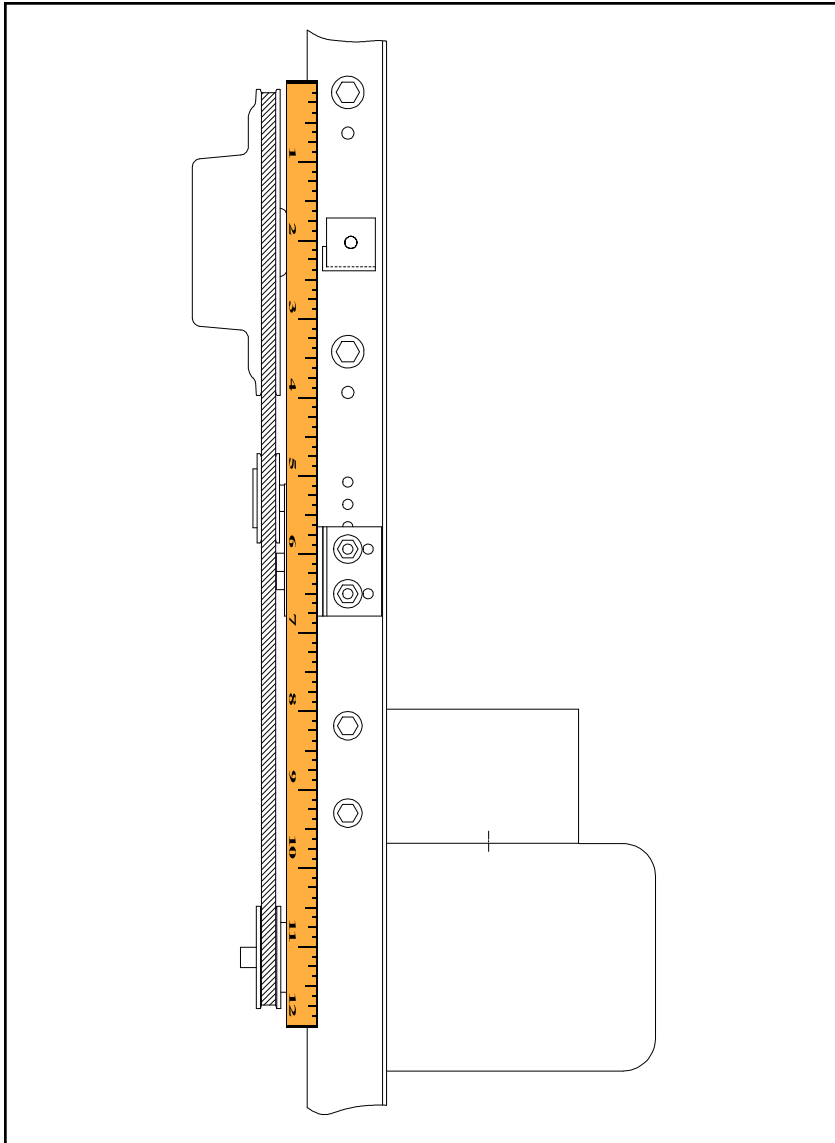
Detailed View of Properly Aligned Fan Sheaves
